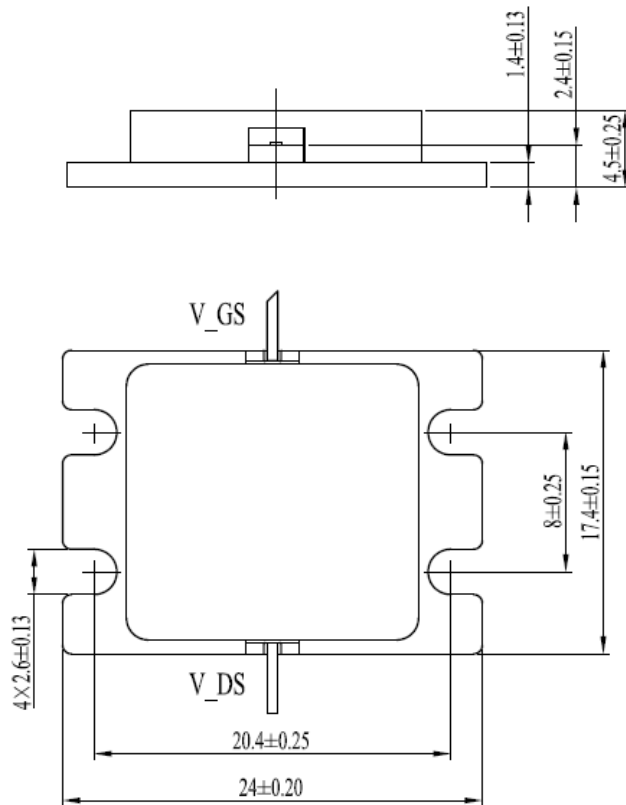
Metal Package Dimensions (all dimensions in millimeters)
